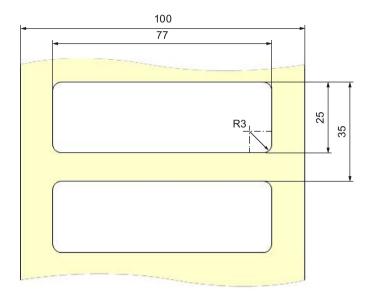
Dimension drawing RF690L (USA/Canada, article number: 6GT2810-2AG10)
